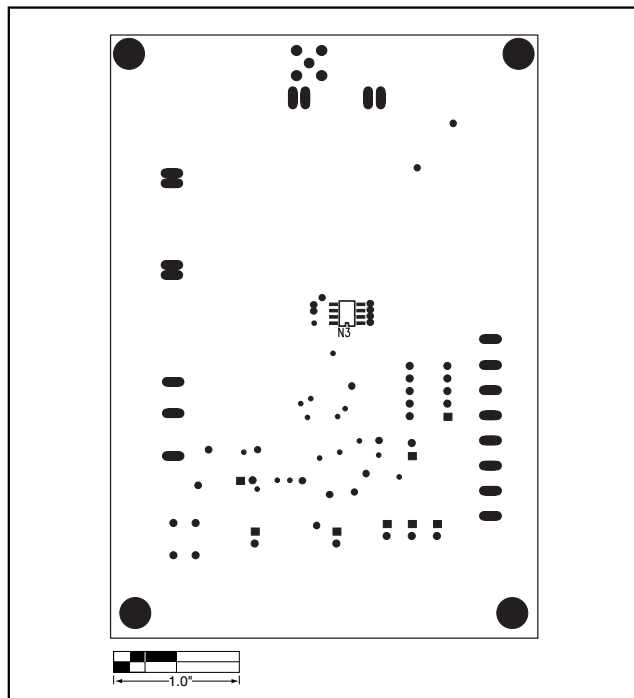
MAX1711 Voltage Positioning EV Kit Component Placement Guide—Solder Side
